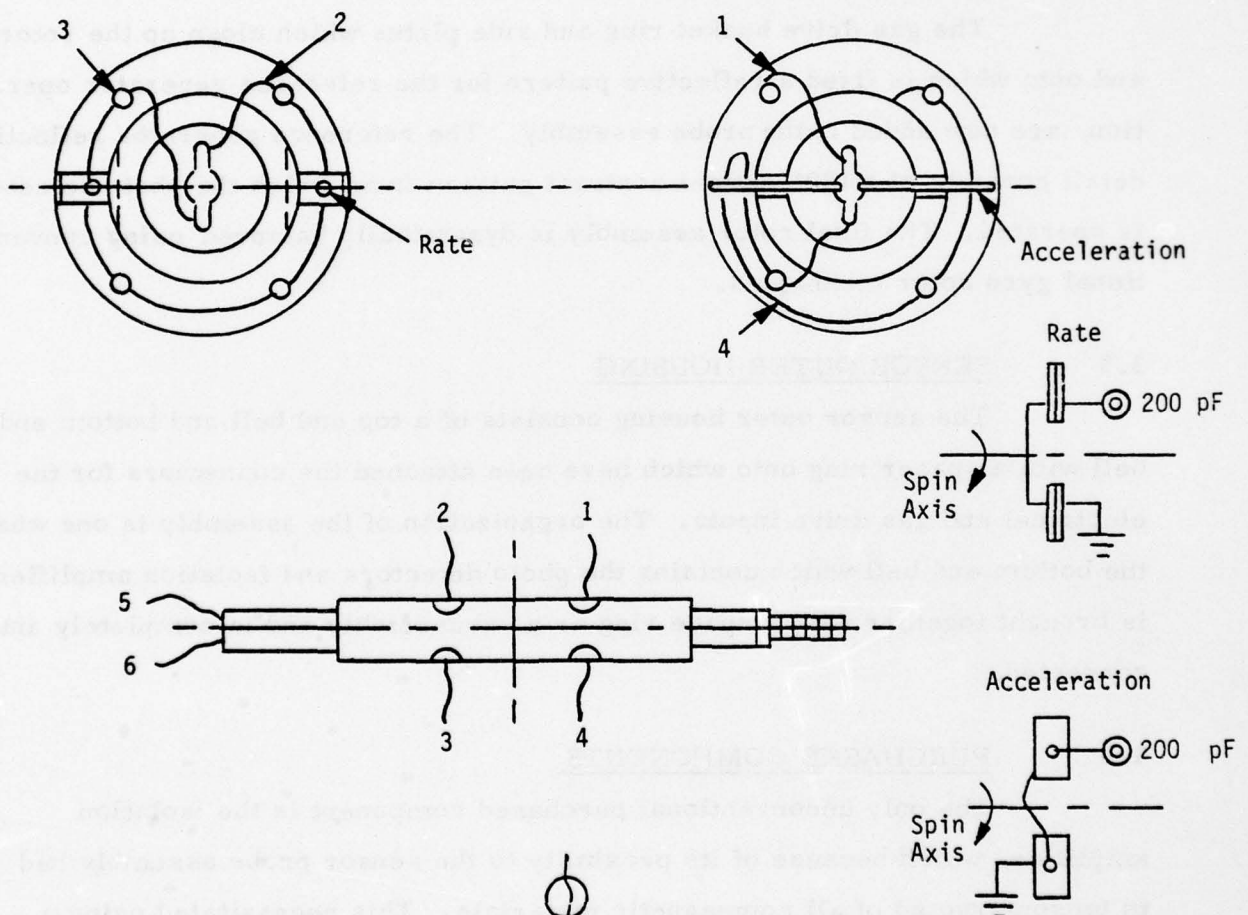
Slipring/Shaft to Sensing Probe Assembly.
